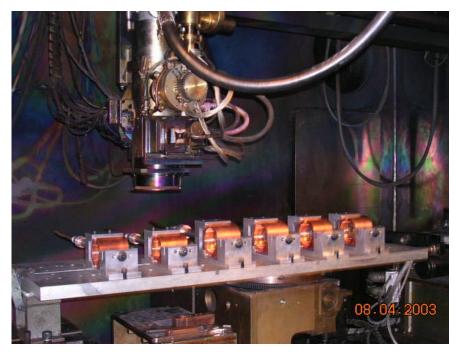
EMD Drift tubes loaded in e-beam welder.
